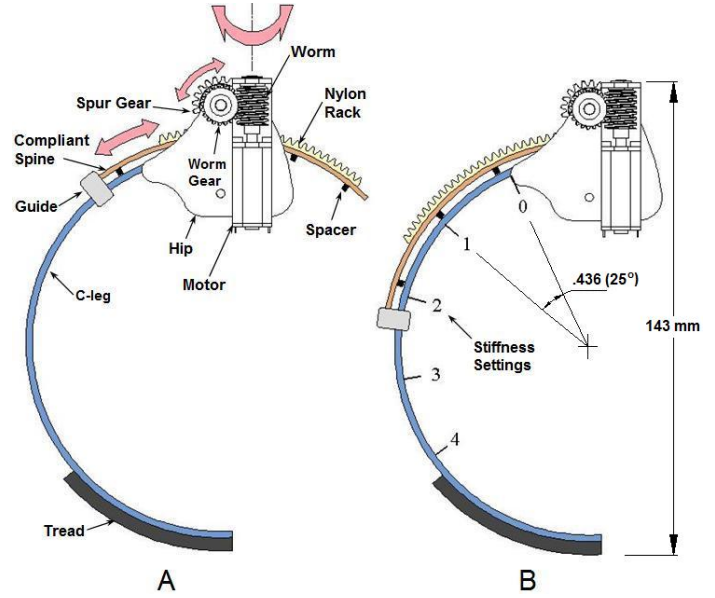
PROPOSED NEW DESIGN: SIDE VIEW OF TUNABLE STIFFNESS COMPOSITE LEG DESIGN. A) ILLUSTRATES THE ROTATION DIRECTIONS OF GEARS B) ILLUSTRATES THE SPINE ADJUSTED TO A HIGHER STIFFNESS SETTING.
